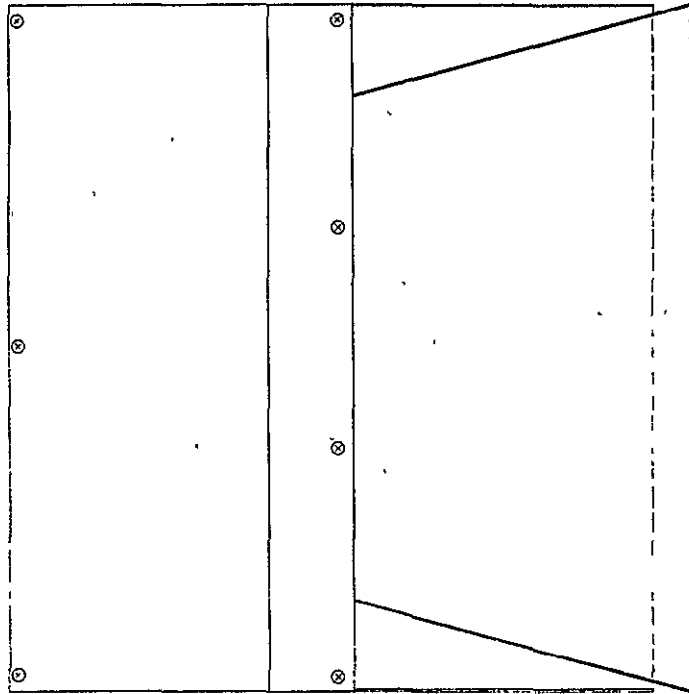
Mechanical Assembly of Dual Fetch Multi-Element Radiant Cooler
